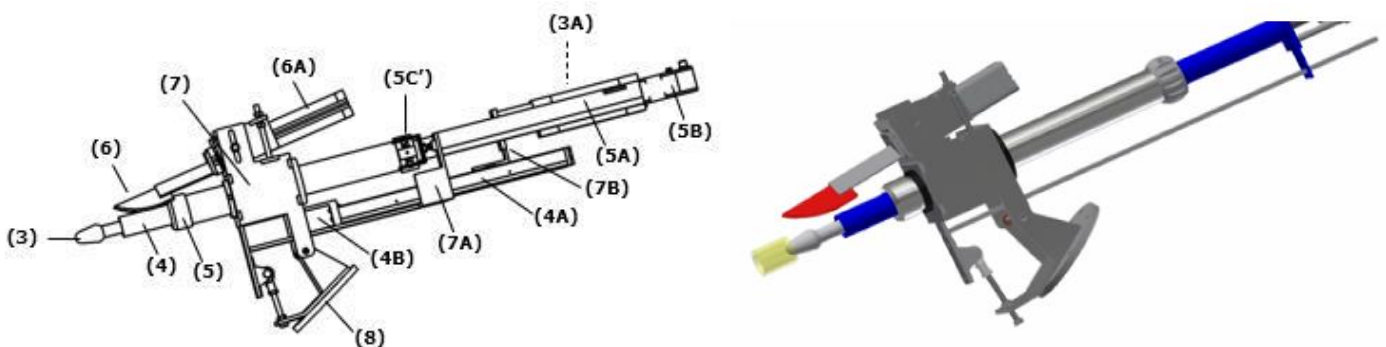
Technical drawing and design of fully automated bung cutter with actuators
